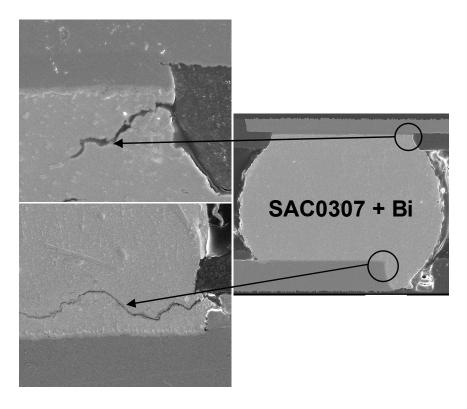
Failure Modes observed in SACX Solder Joints
